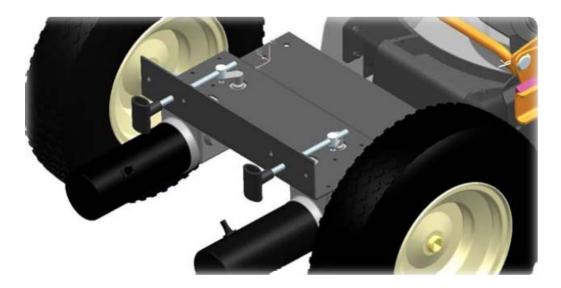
B – Example of mounted motors behind the main chassis (upside down). Reprinted with Masato Hayashi's permission.
